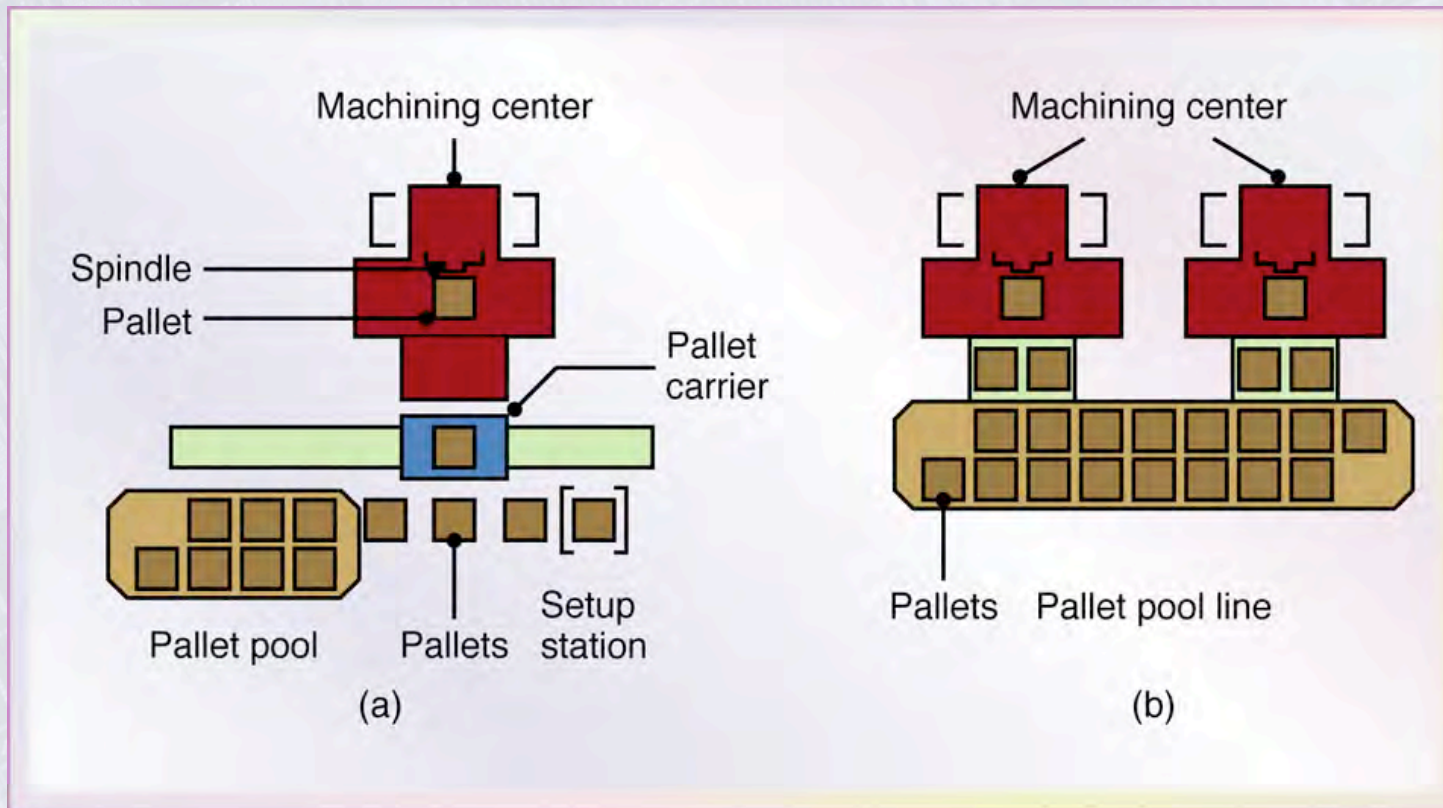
(a) Schematic illustration of the top view of a horizontal-spindle machining center showing the pallet pool, set-up station for a pallet, pallet carrier, and an active pallet in operation (shown directly below the spindle of the machine). (b) Schematic illustration of two machining centers with a common pallet pool. Various other pallet arrangements are possible in such systems. *Source:* Courtesy of Hitachi Seiki Co., Ltd.
